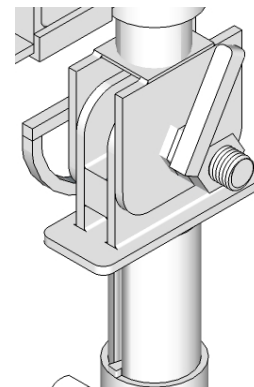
Shows the pictorial drawing of the apparatus in a buttress joint
